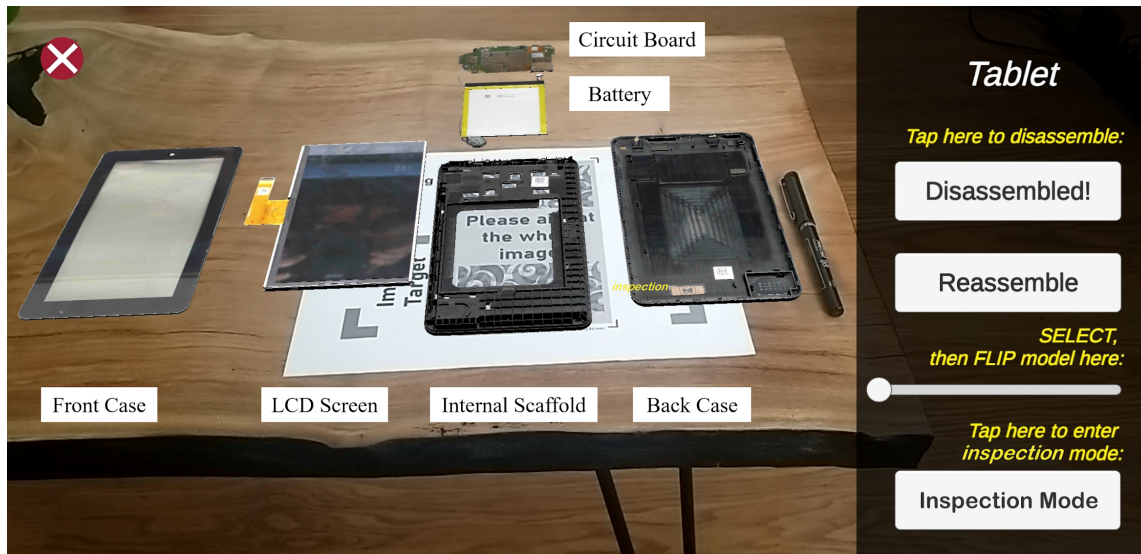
In the Disassembly/Reassembly mode, the electronics tablet can be disassembled into six sub-assemblies: front case, LCD screen, internal scaffold, circuit board with speaker, battery, and back case. (Sub-assembly labels added for reference and pen included for scale.)
